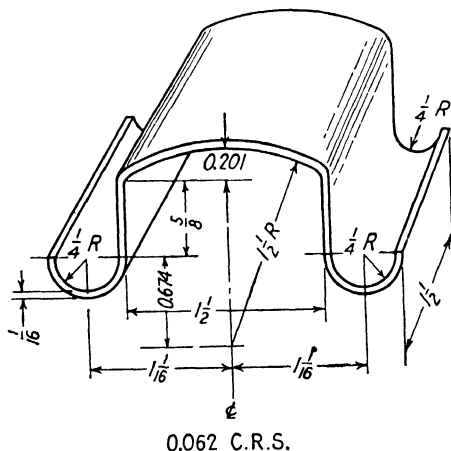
A sheet steel piece, one of which is completed at each press stroke.
